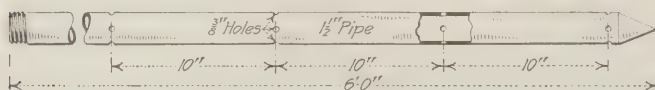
THERMOMETER PIPE TO SINK IN COAL PILE
